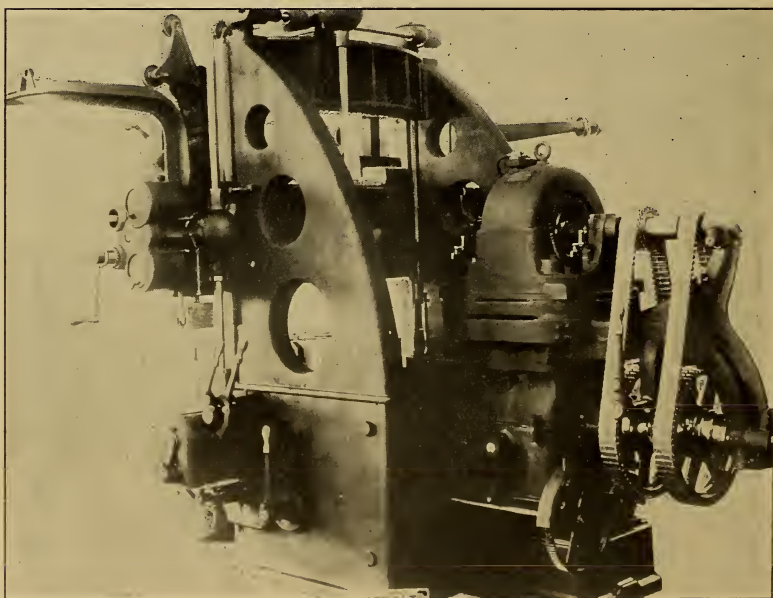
MORSE CHAINS AND ELECTRIC MOTOR DRIVE ON BORING MILL
